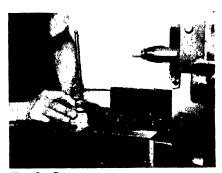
Setting up job in shaper vice to previously marked-out lines with surface gauge
